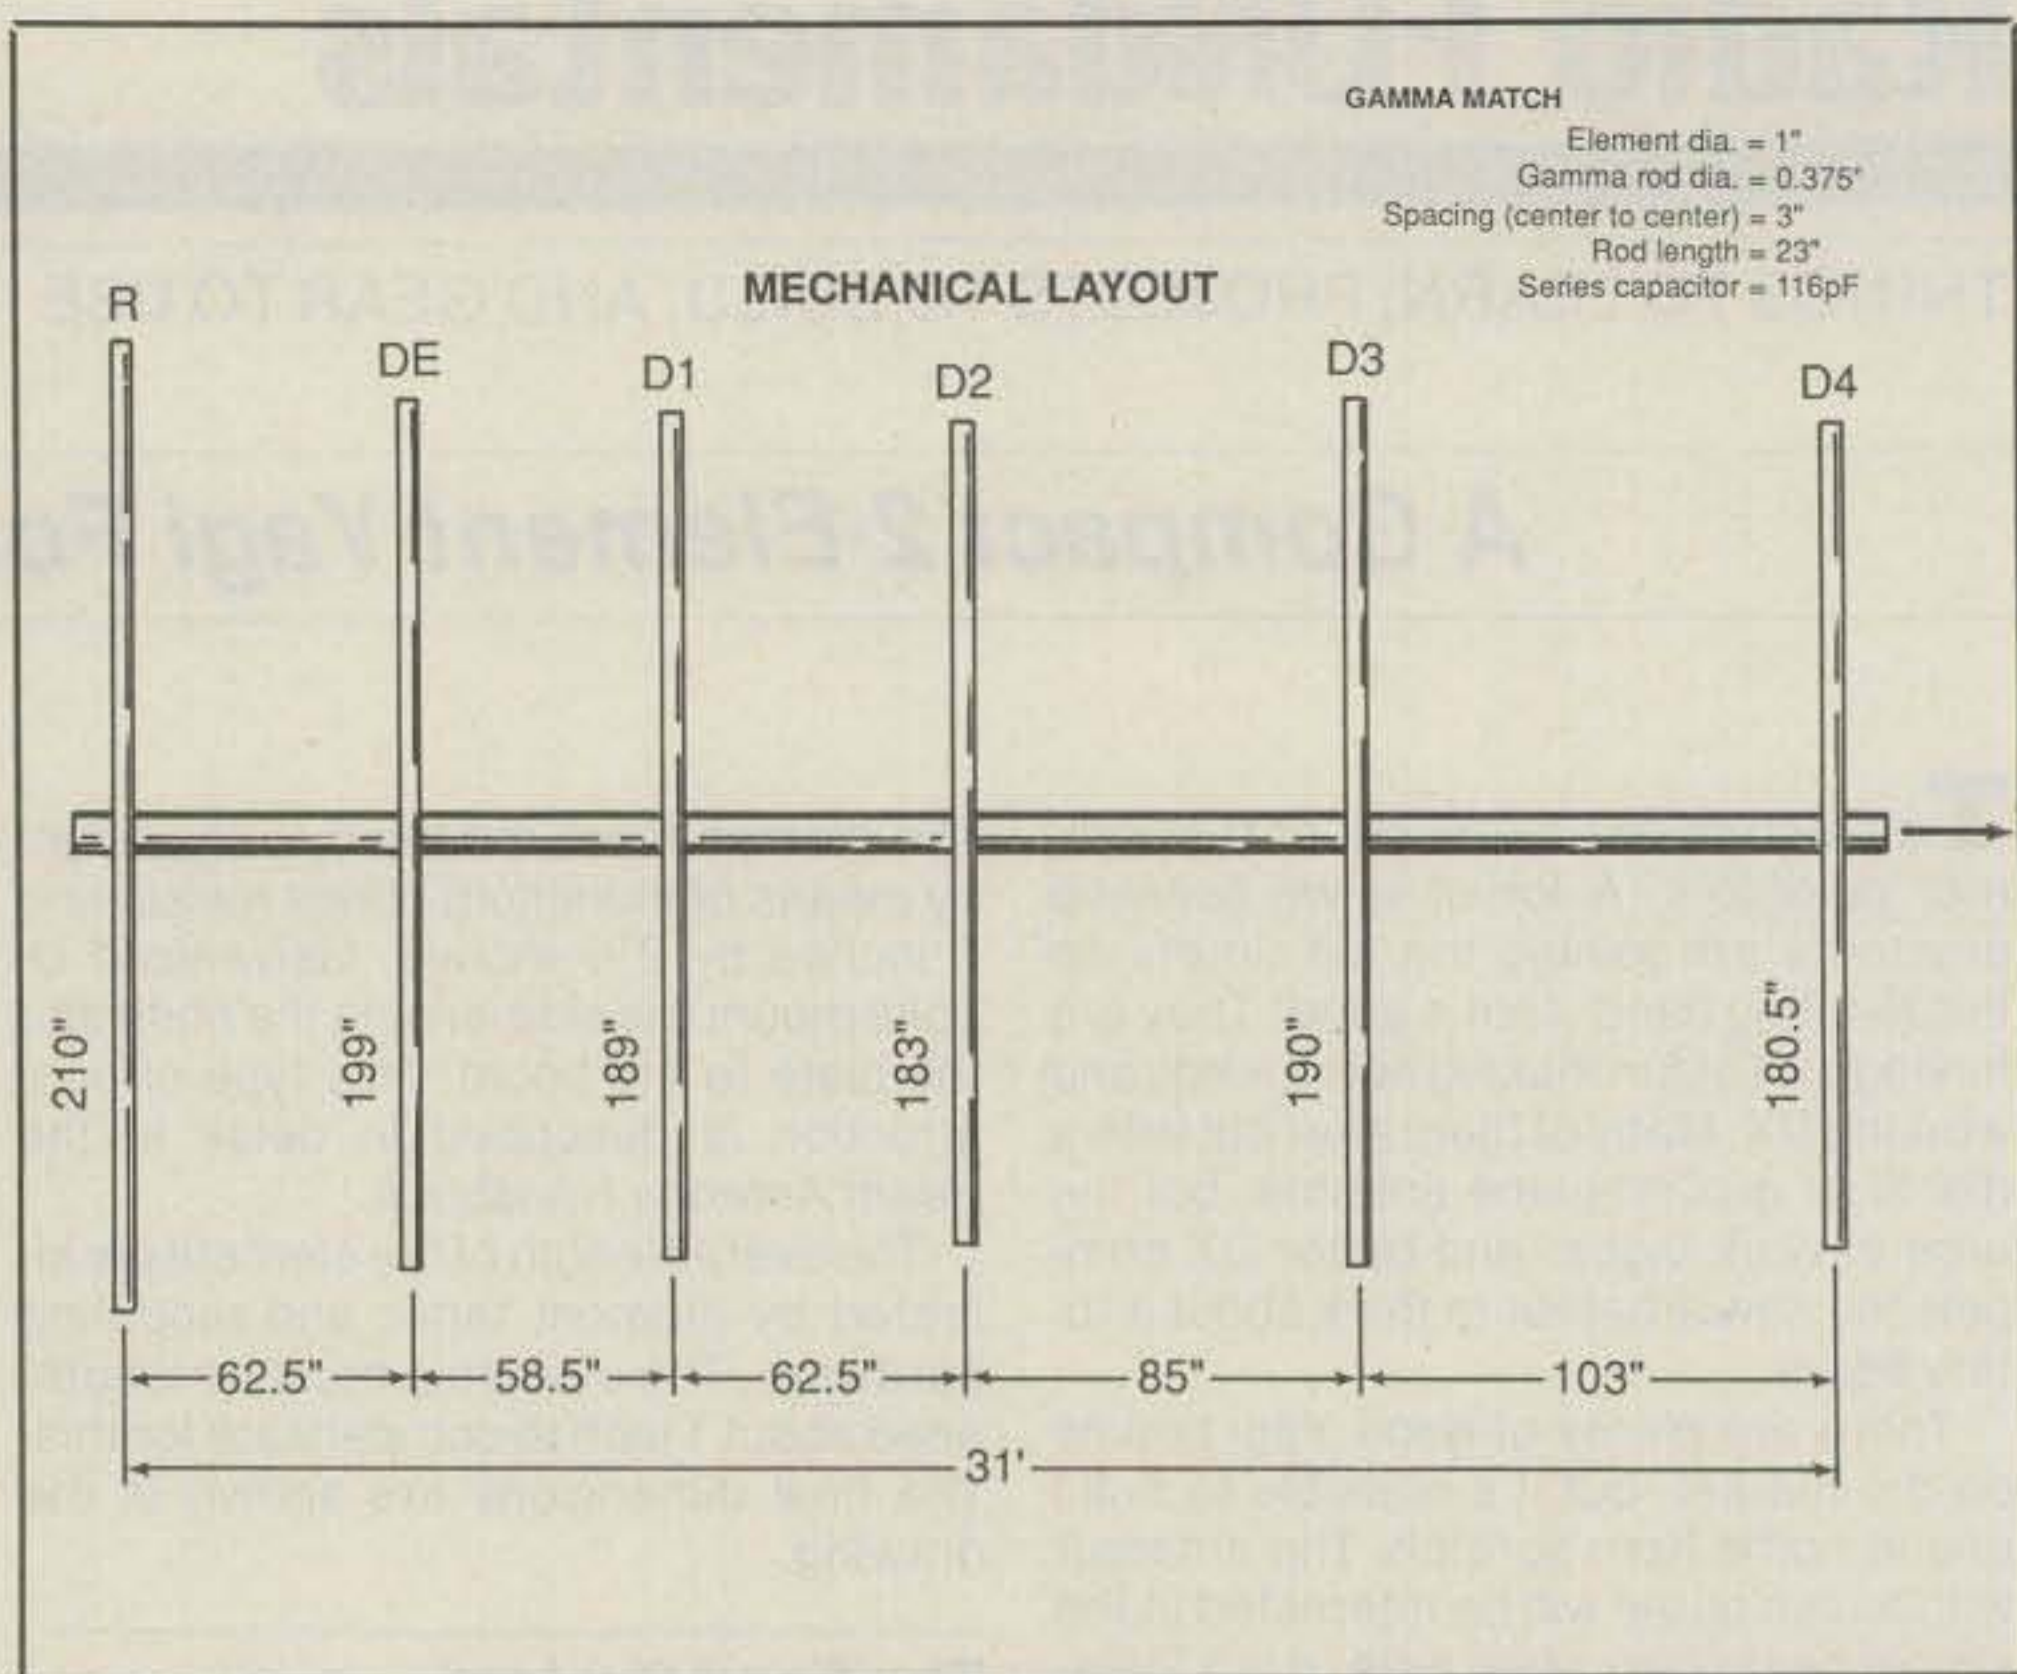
Assembly of "big gun" Yagi. See fig. 1 for element assembly. Feedpoint resistance is about 30 ohms.
